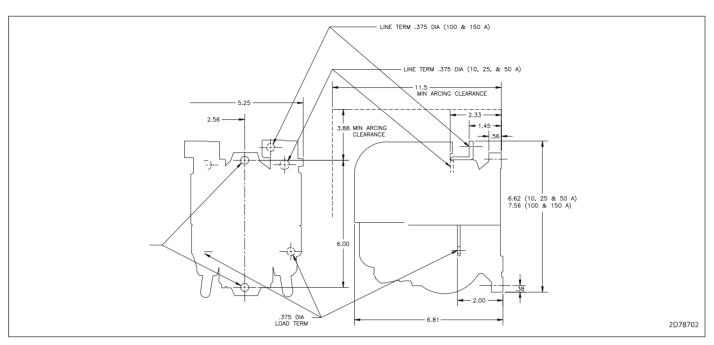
Dimension Drawing of 2NO Pole ME Contactor (dimensions in inches)
